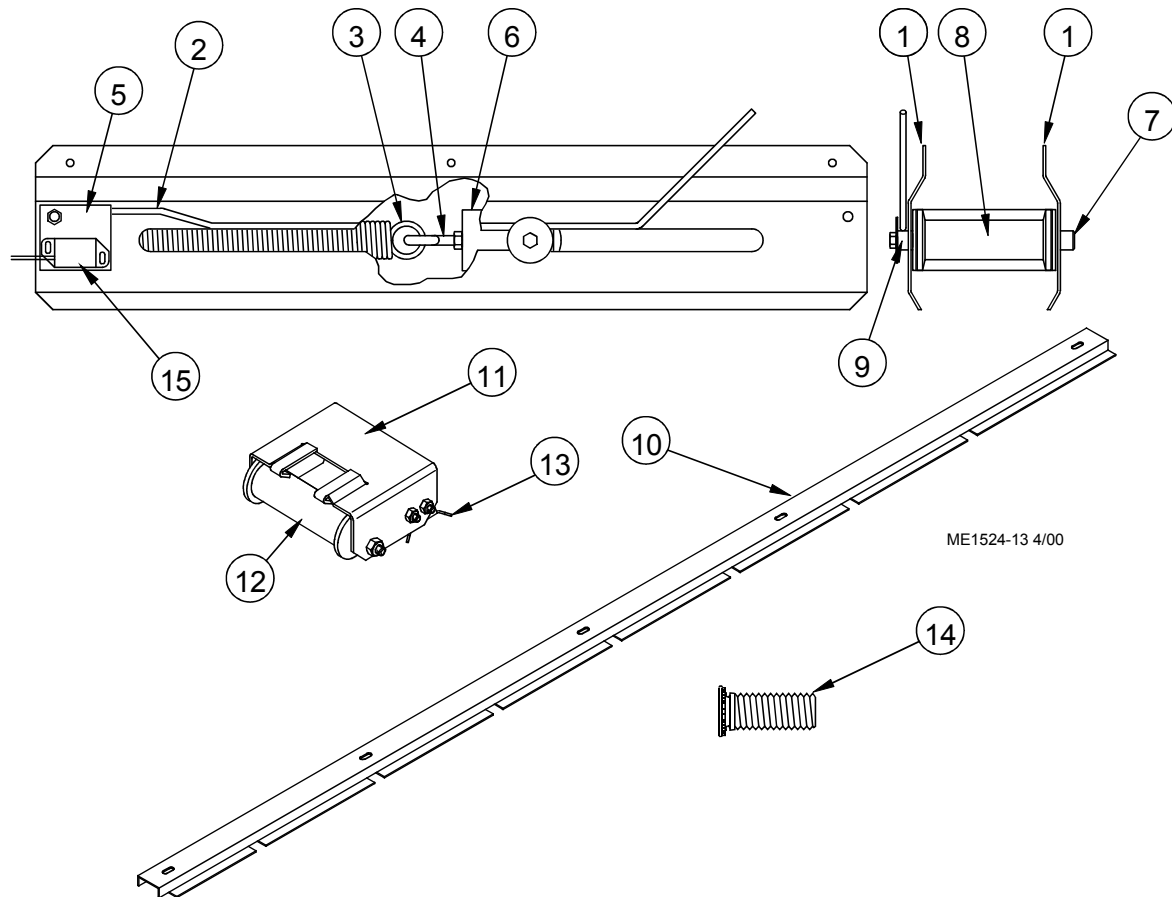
Take-Up Belt Assembly—Tight Belt Travel (Left Hand/inside view).
